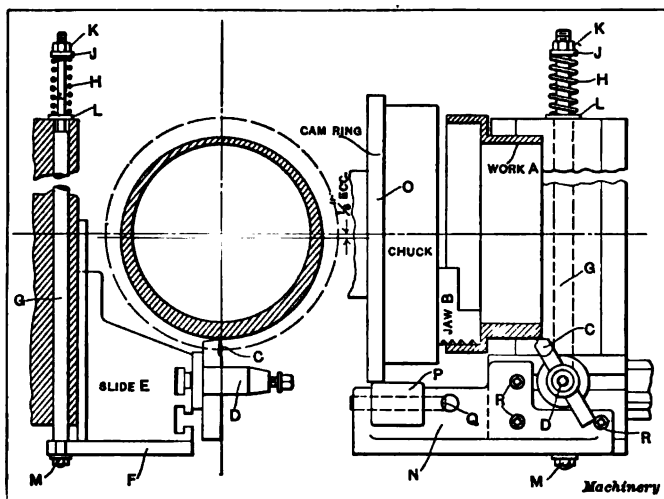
Eccentric Turning Attachment for Engine Lathe
